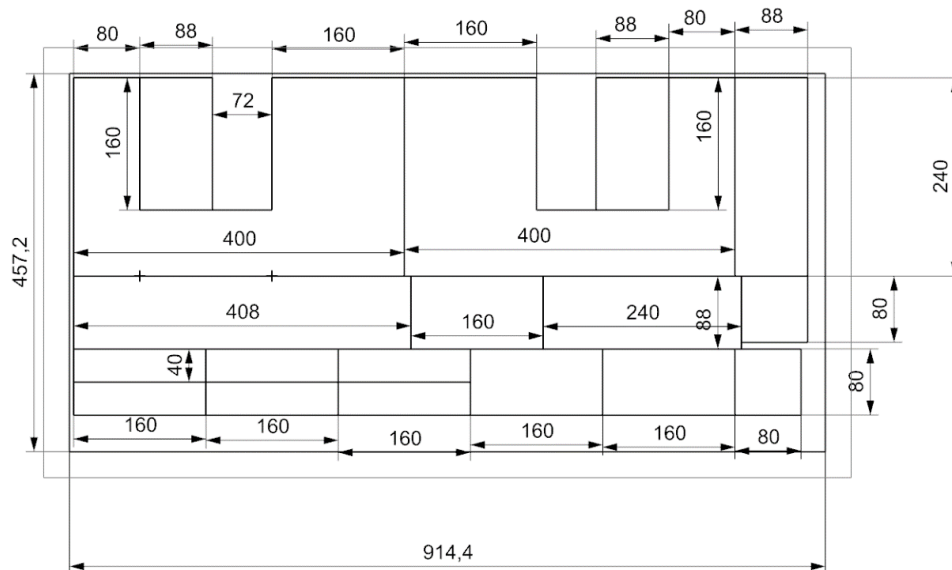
Cutting Layout, *all dimensions are in mm.
